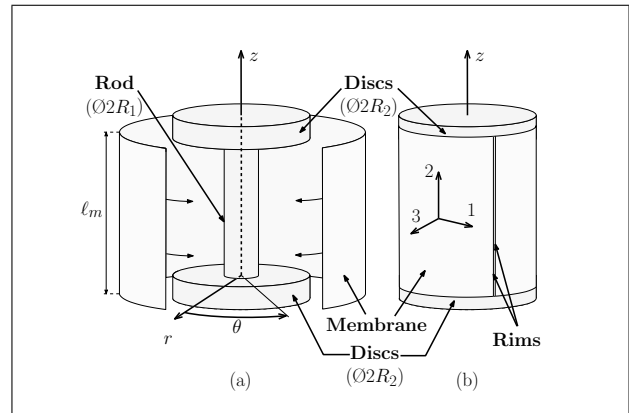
3D view of the emitting transducer: (a) before fixing the PVDF membrane to the discs, (b) final assembly.
